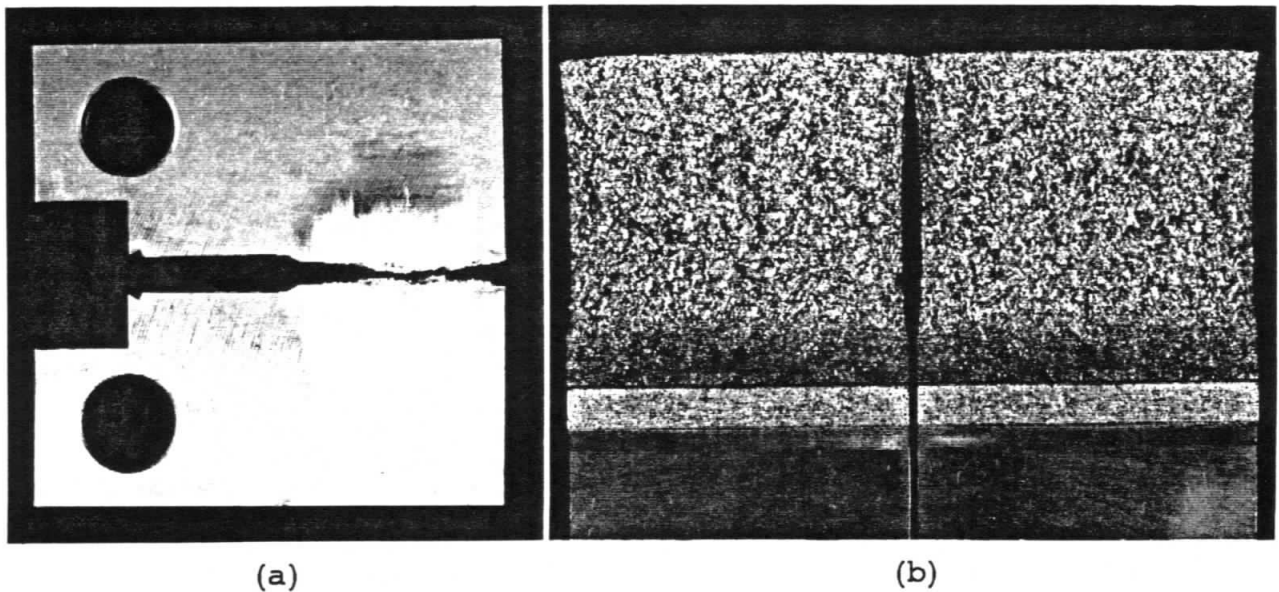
One Inch CT Specimen for Elastic Plastic Fracture Toughness Test Shown in FIG.13; (a) Behavior of Fracture Progress, (b) Fracture Surface.
